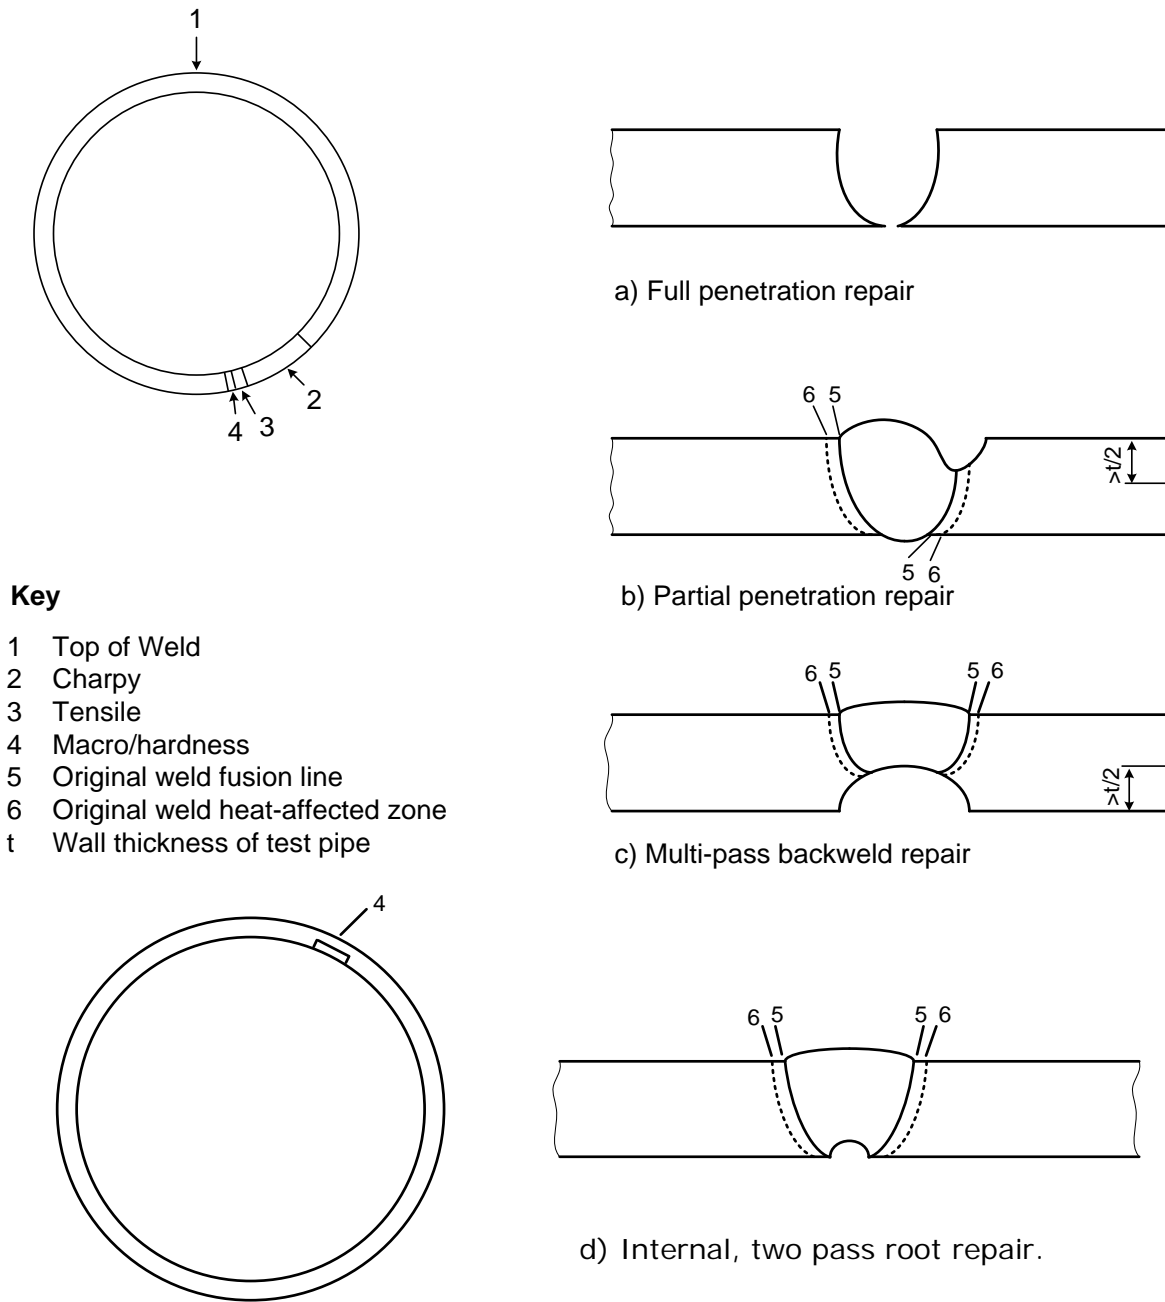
Location of Test Specimens for Butt Weld Repairs
